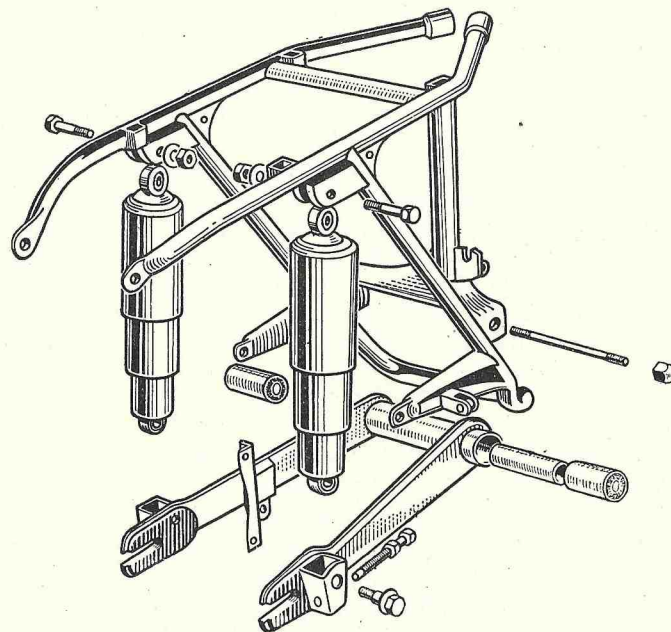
ARIEL PIVOTED REAR SUSPENSION FITTED TO 1954-59
